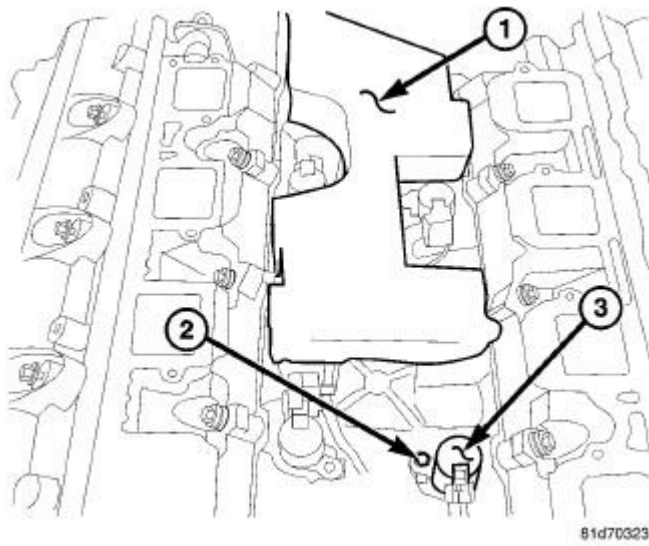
Intake Manifold Foam Insulator Pad, MDS Solenoids & Bolts
